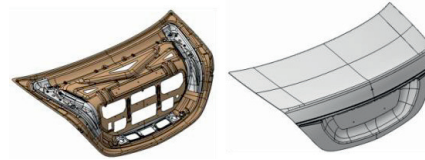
Example of assembly: trunk lid; left: reinforcing assembly; right: covering assembly
